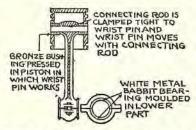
Note that in this type the piston pin moves with the upper end of the connecting rod, and the bearings are in the piston bosses.
